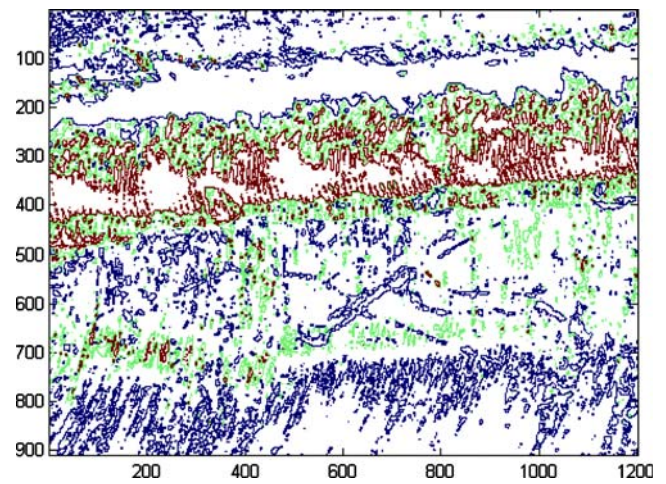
Highly fractured contours of a welded plate with lesser pin depth
